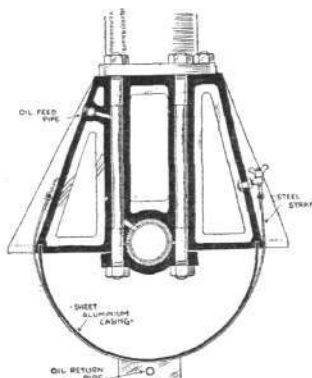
Sectional sketch illustrating the oil-way to the crank-shaft bearings on the Green engine.
